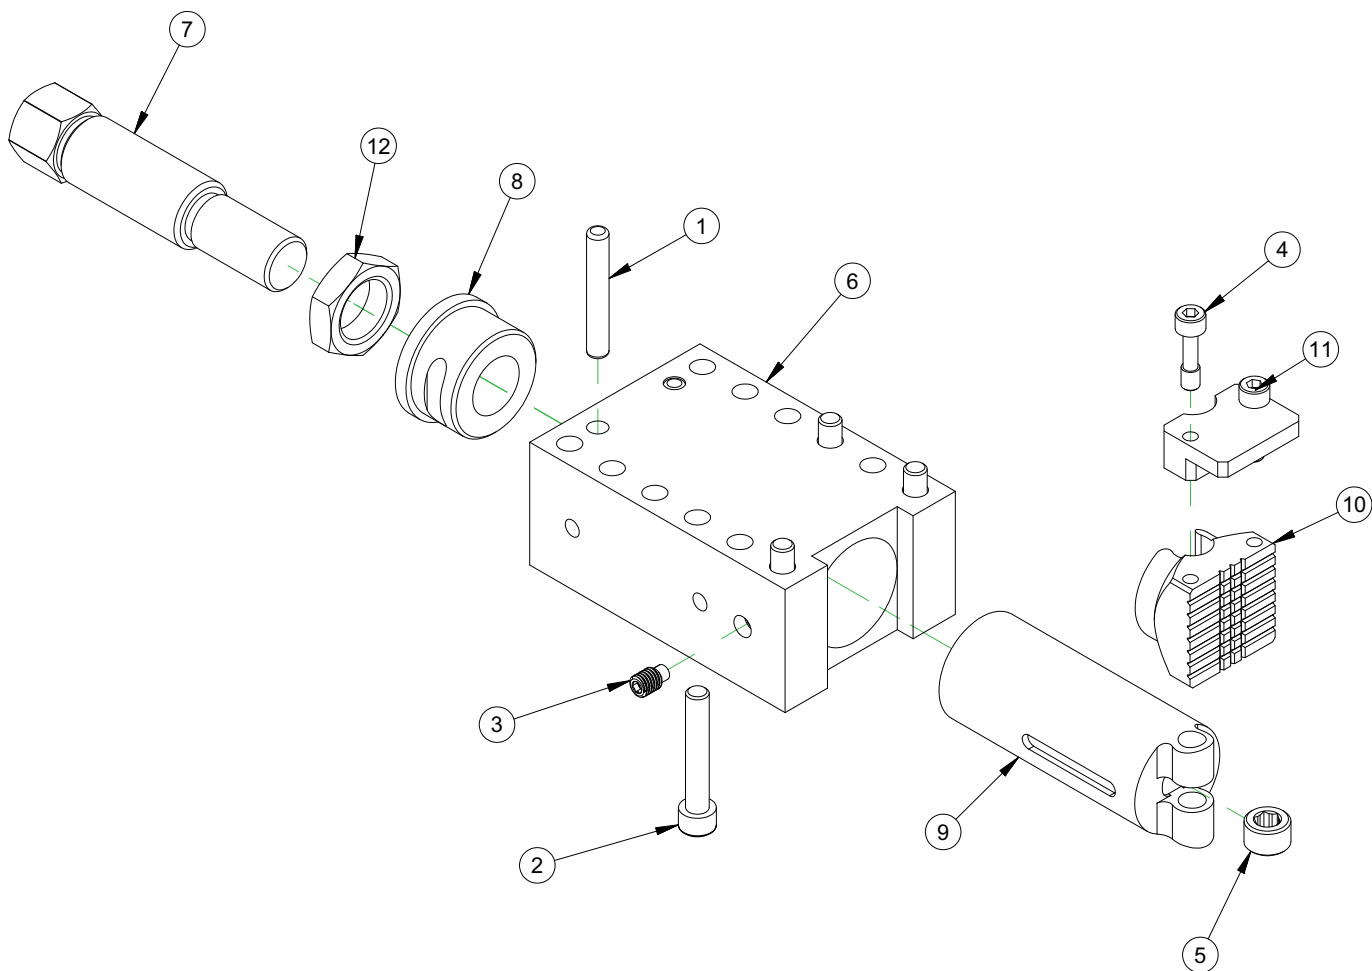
PNEUMATIC CONDITIONING UNIT ASSEMBLY PARTS LIST (P/N 101920)
